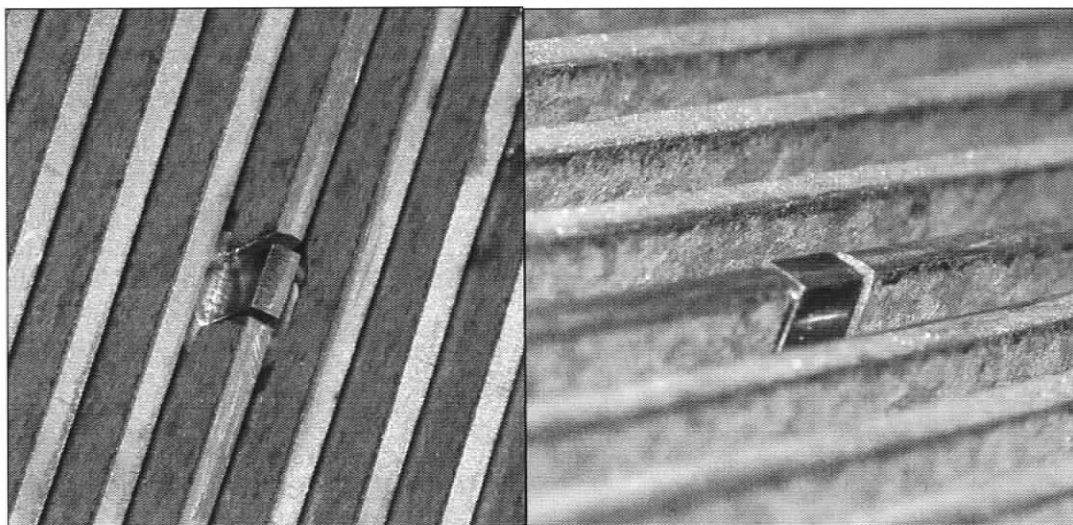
, RFS4-LC installed in the Conflo[®] JC-00 Stator (inside view)
